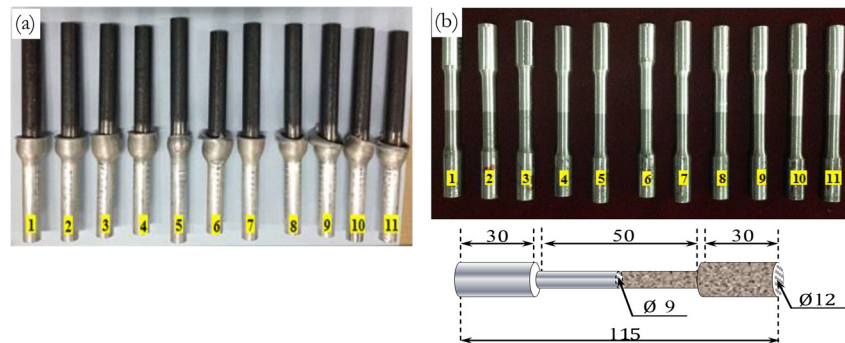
Friction welded samples: (a) Macroscopic view ; (b) Tensile testing specimen details (Unit: mm)
